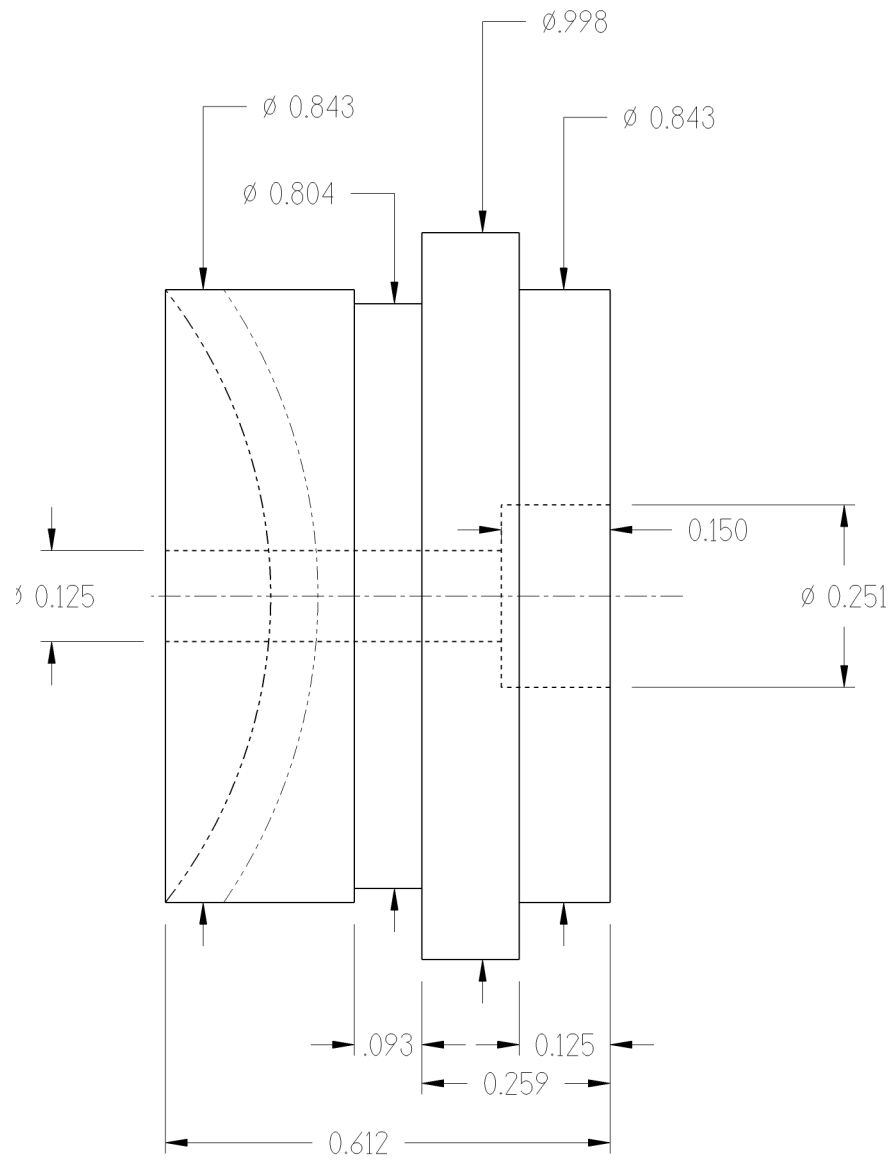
Machine shop drawing for the plug adapter for the pitot-static tube. When the pitot-static tube is not in use, a similar plug is used without the Ultra-Torr component and through-hole. Lengths are shown in inches.
